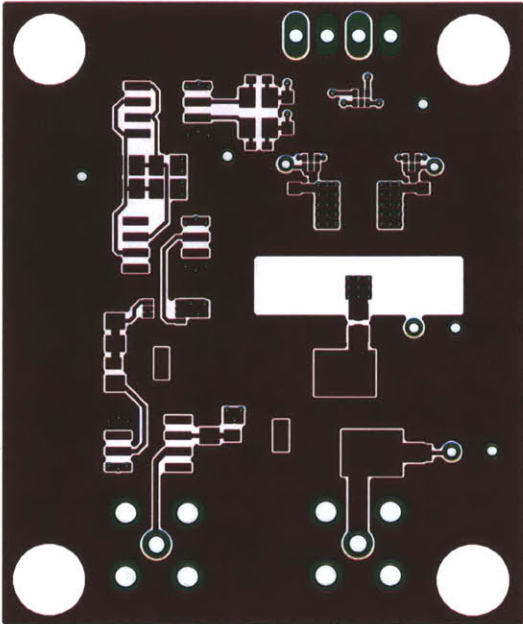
The Layer 1 PCB Layout of the Frequency Multiplier Prototype.
